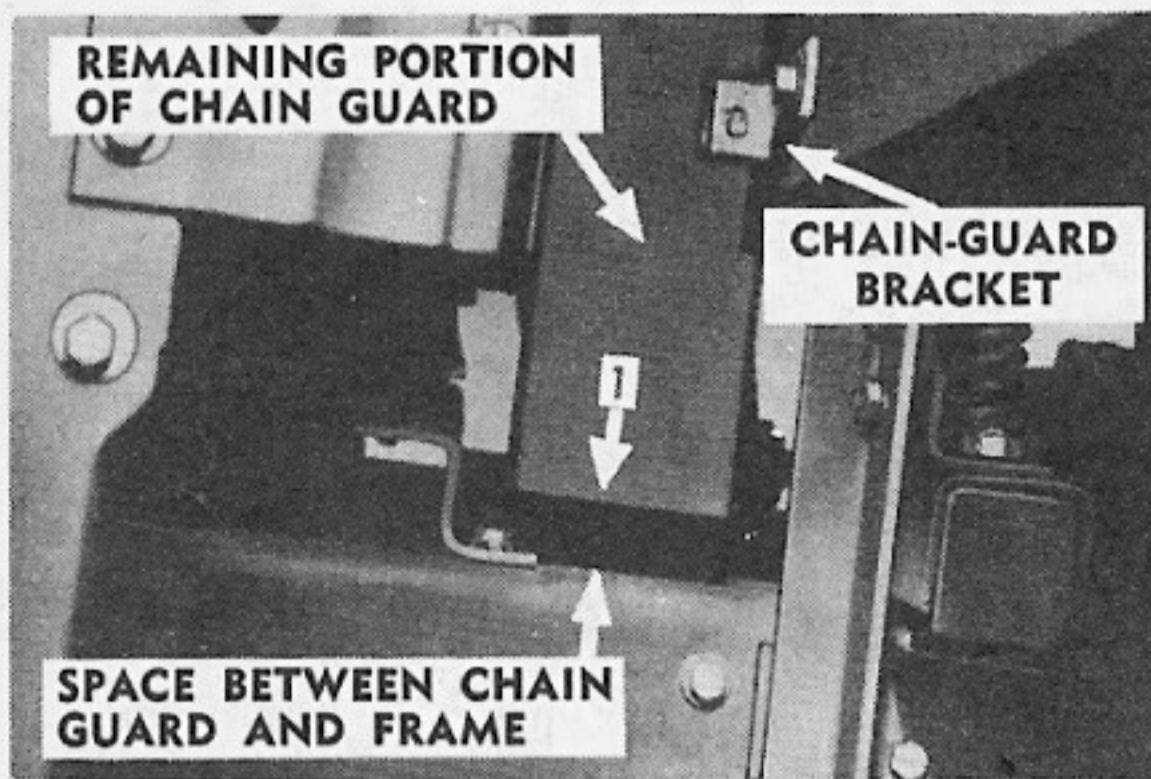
Remove lower chain-guard, cut it off 1" above top of frame, and discard lower portion. Separate chain and remove double-bearing assembly with propeller shaft attached. Cut 1½" off the spline end of the shaft and taper it as before, removing all burrs. Discard bearing-assembly support. Fig. 2—Remove entire exhaust line. Disassemble exhaust pipe and tailpipe from muffler, then cut off and discard 13" of tailpipe from muffler end. Make and install a piece of pipe 13" long, attaching it to the exhaust pipe at the muffler end.
